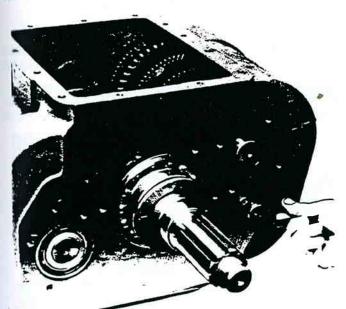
Placing Support Tool in Rear Bearing Bore.
